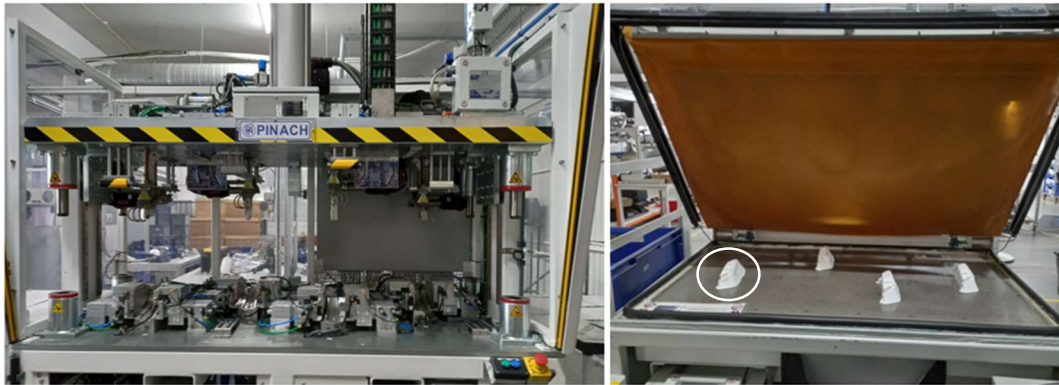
Pinach machine on the left. Vacuum machine on the right, with the white supports for the pieces.
